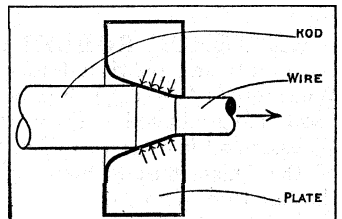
STEEL ROD BEING REDUCED TO WIRE IN PASSING THROUGH PLATE
